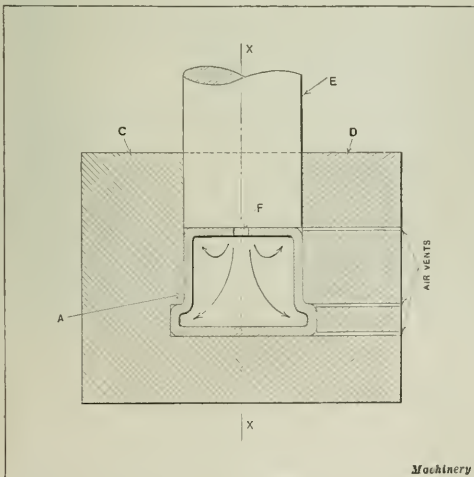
Sectional View of "Oil Extrusion" Die for Final Forming Operation on Shell A
